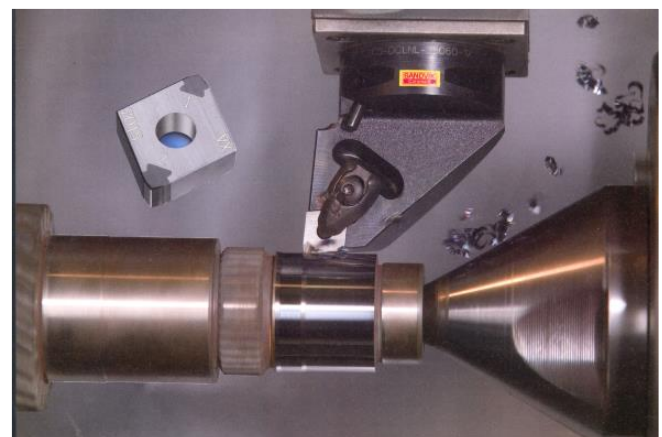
Example of machining a hardened shaft with BN blades [14]
